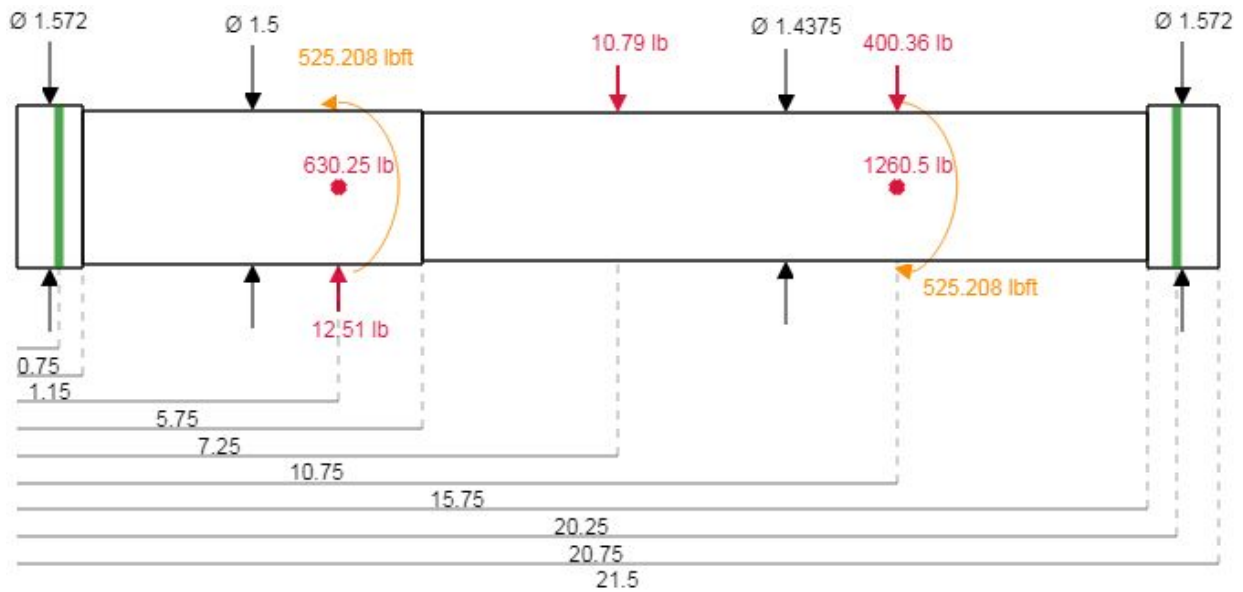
SkyCiv-generated FBD of Shaft CD (All Dimensions in Inches and Bearing Centerlines Identified in Green)
